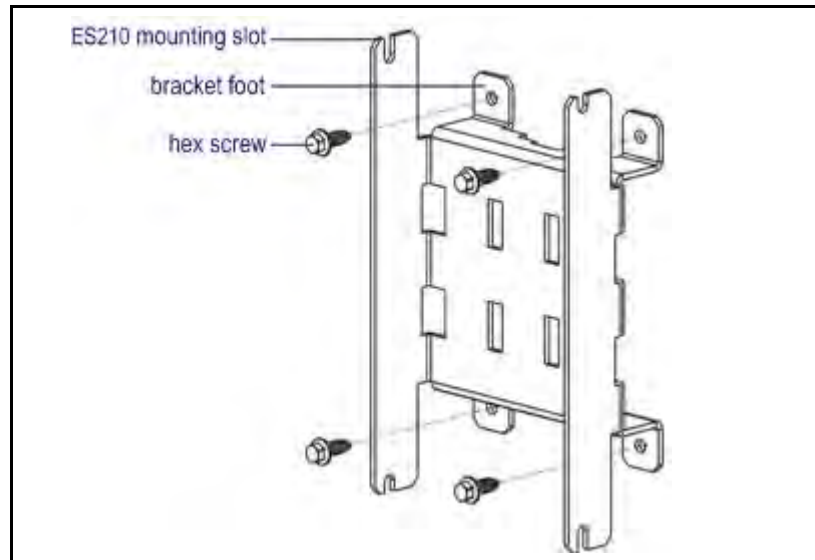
Surface Mounting the Bracket before Attaching the ES210
